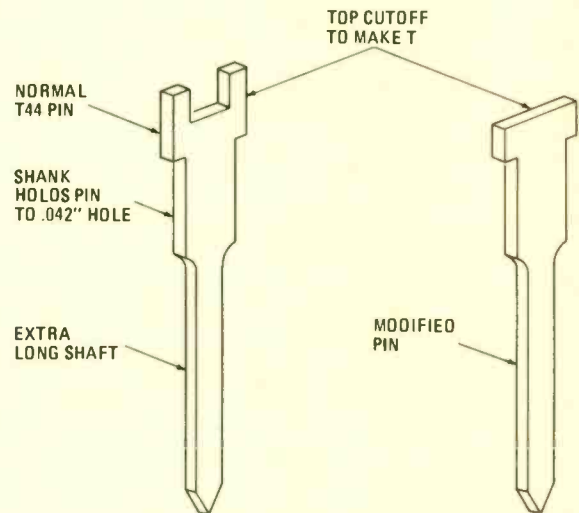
MODIFIED T-44 PIN has notch section cut off forming a "T" pin substitute for the type T-46.
